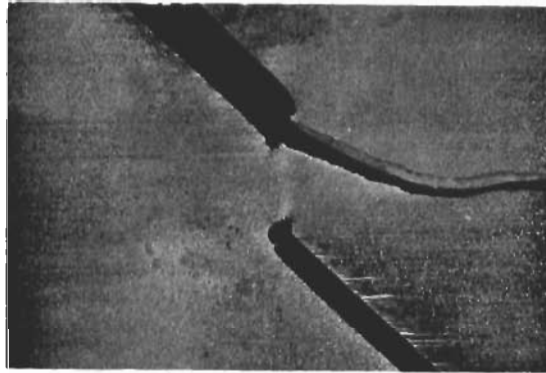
PLASTIC DEFORMATION OCCURRING PRIOR TO TENSILE FRACTURE OF SINGLE SHEAR SPECIMENS
